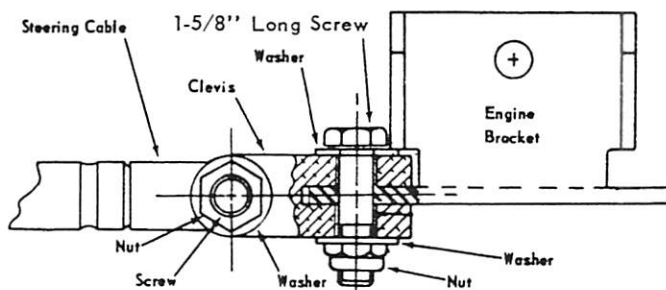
Drawing of Engine Attachment (Except 40 HP and Larger)
